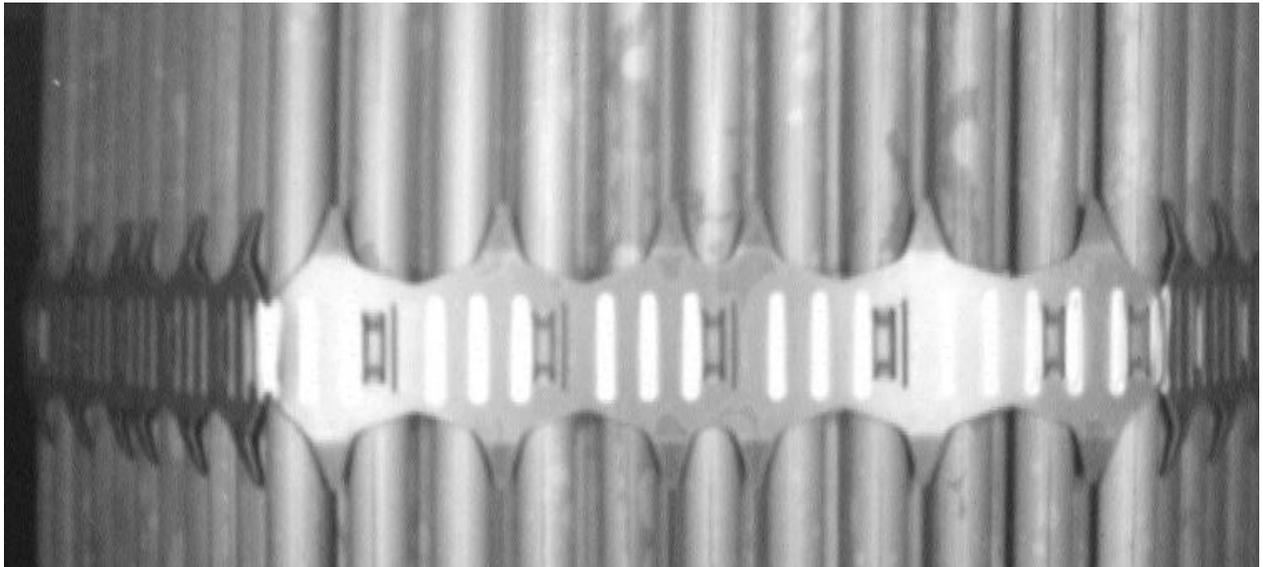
Zr1%Nb grid 9, WLTA AA01-03, face 1, inspection 2010.
